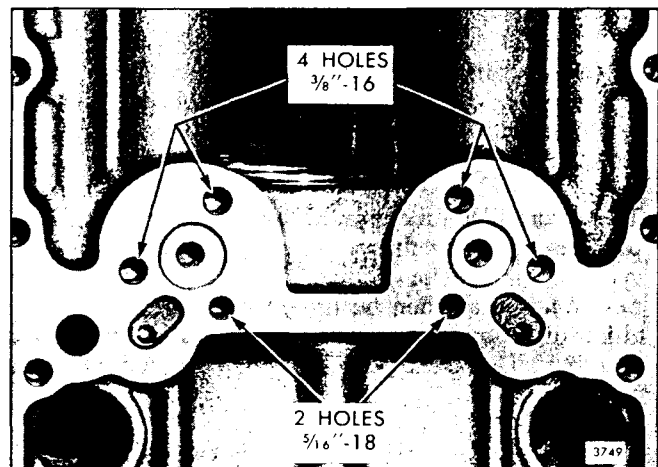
Location of the Four 3/8-16 Bolt Holes in Rear of Cylinder Block
